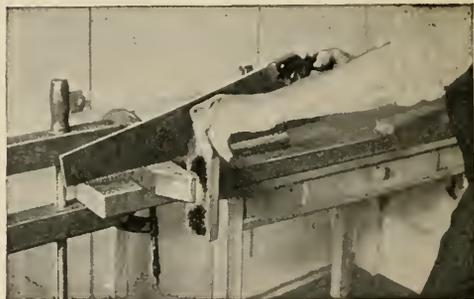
This method of attaching the hand screws is a useful one when boards are to be ripped.
